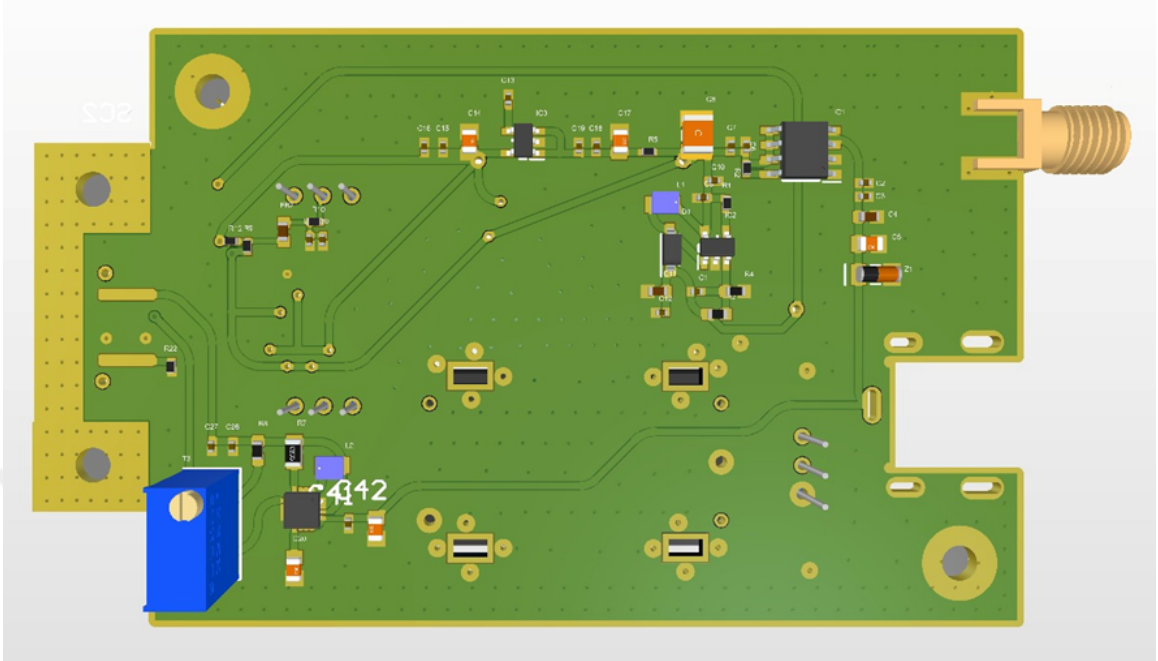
The 3D view of the cathode sensing design's PCB (Bottom view)
